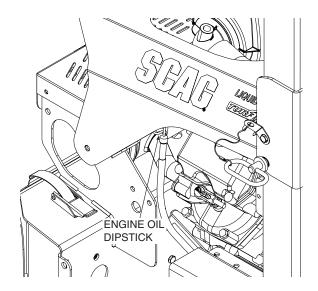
Engine Oil Fill/Dipstick Location Gasoline Engine Shown
